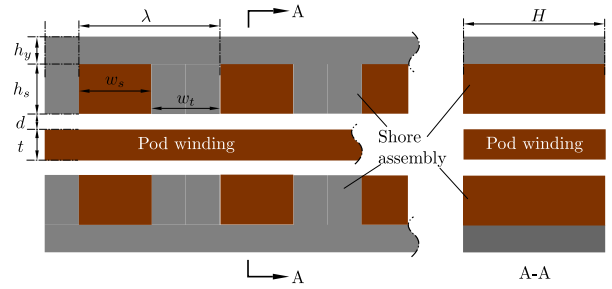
Key dimensions of the linear doubly fed induction machine.
